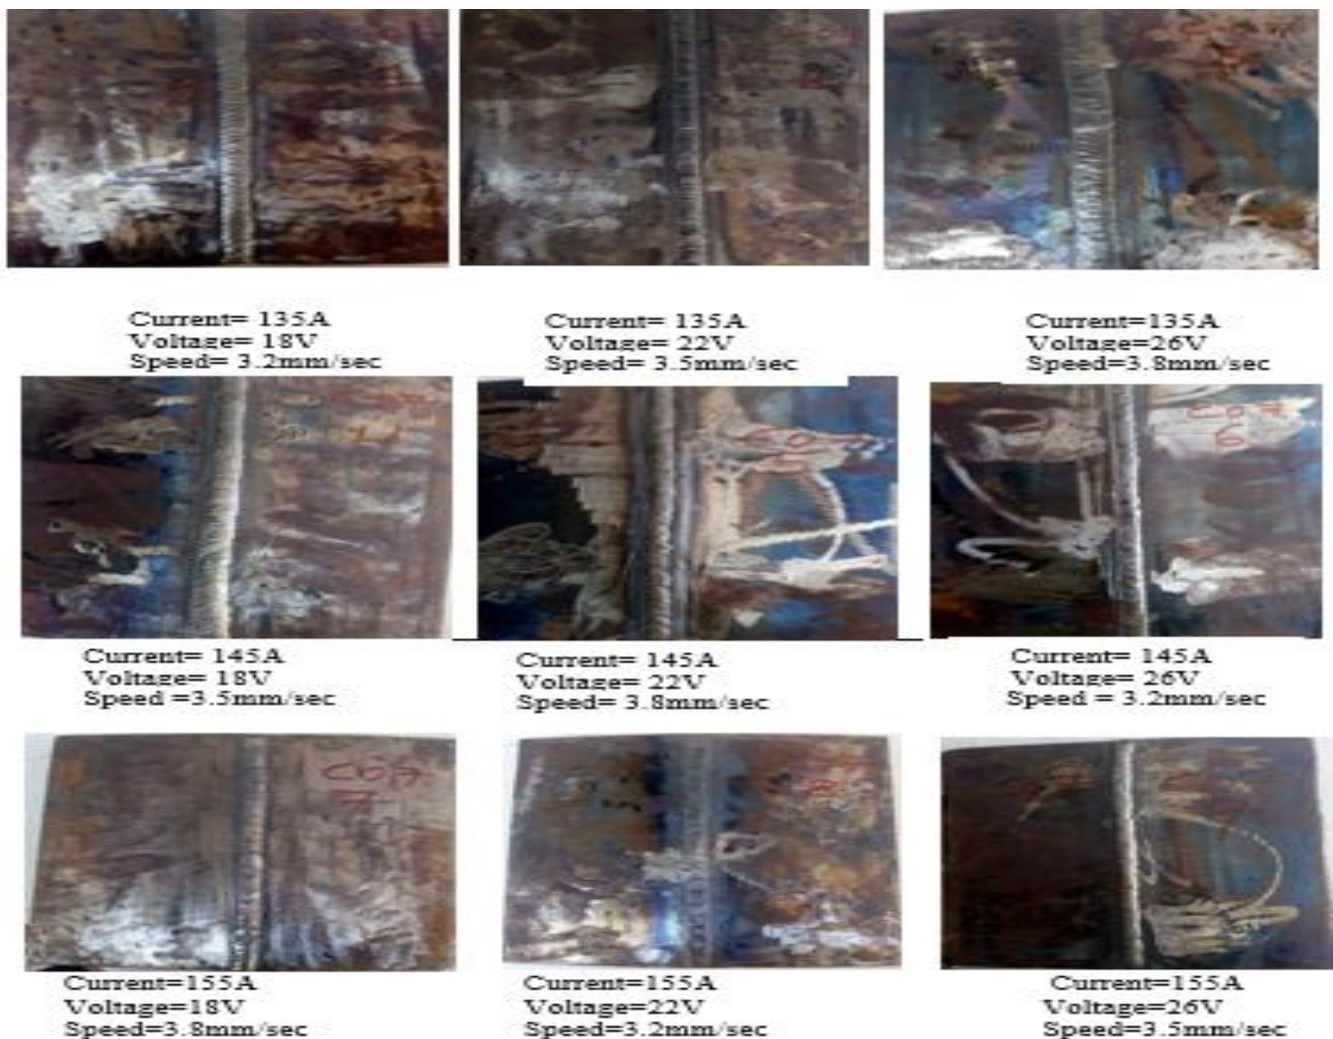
TIG Welded Chrome Alloy Steel joints by varying parameters
